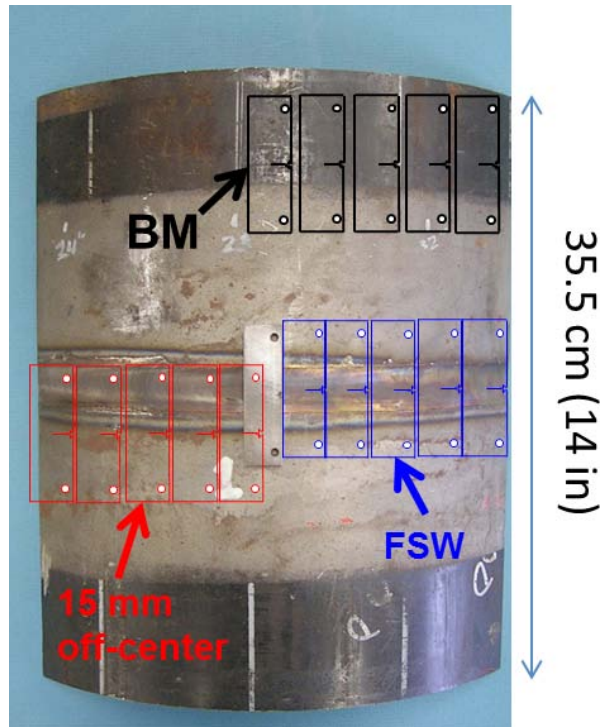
Image of the X52 friction stir welded steel pipe with ESE(T) specimens overlaid to show approximate location of specimen machining. Specimens removed from base metal (BM), center of FSW, and 15 mm off-center from FSW.
